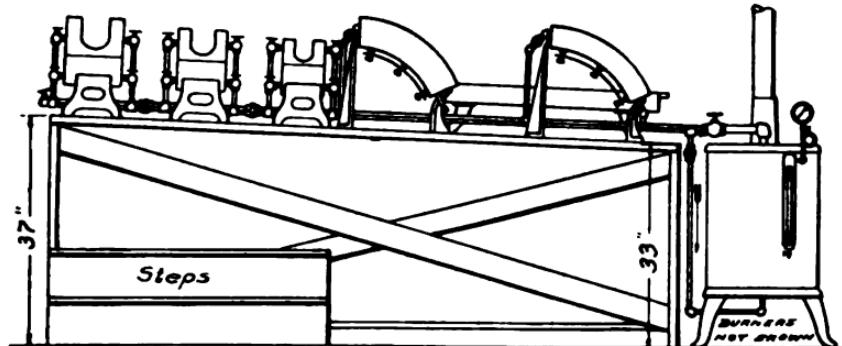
Elevation of Gravity-Return Vulcanising Plant
